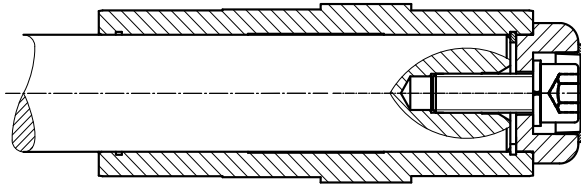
Gear unit mounted to shaft without a shoulder using the fastening element
